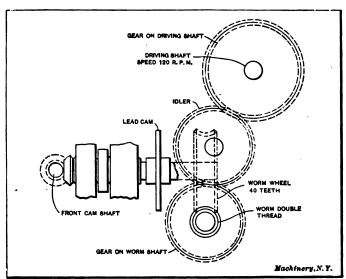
Diagram of Gearing on the No. 00 Brown & Sharpe Automatic Screw Machine
